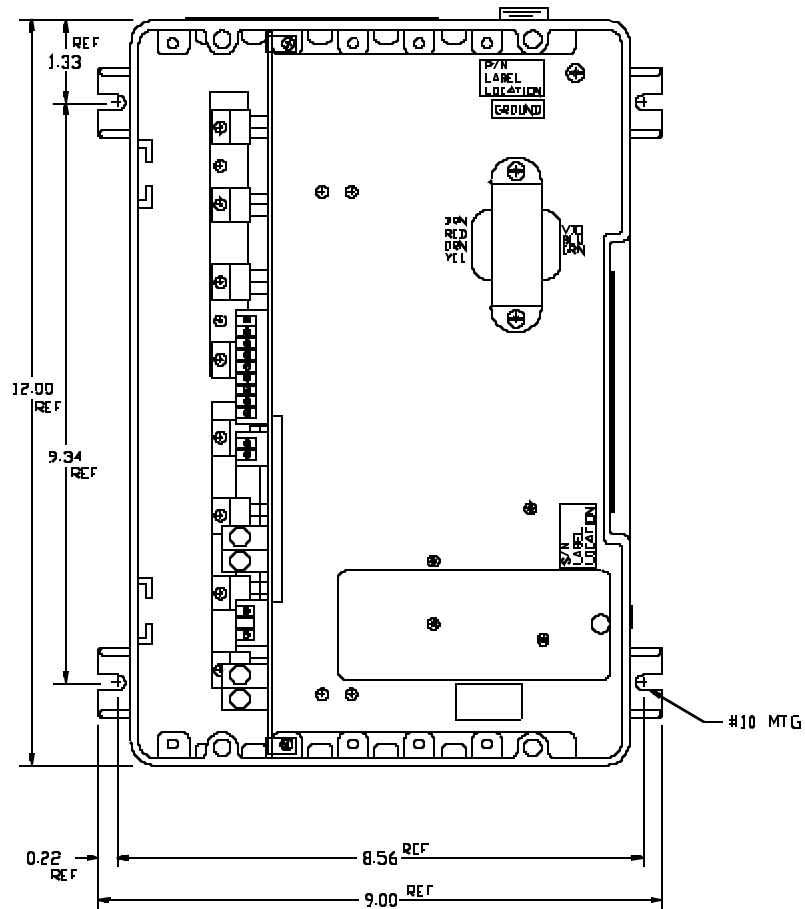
CONTROLLER MOUNTING DIMENSIONS, MODEL 2242
